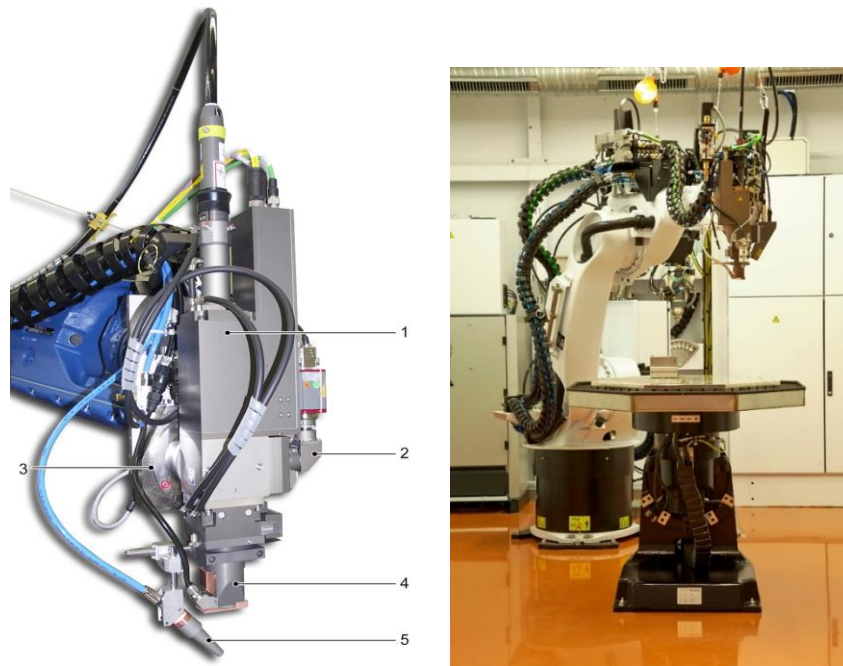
TruLaser Robot equipped with Welding Processing Optics. 1 Processing optics BEO D70; 2 Monitoring camera with monitoring Software; 3 Magnetic coupling; 4 Cross-jet; 5 Inert gas nozzle
